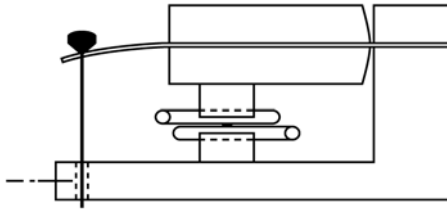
Constant Force Crossed-Wire Fixture: Loaded Position
